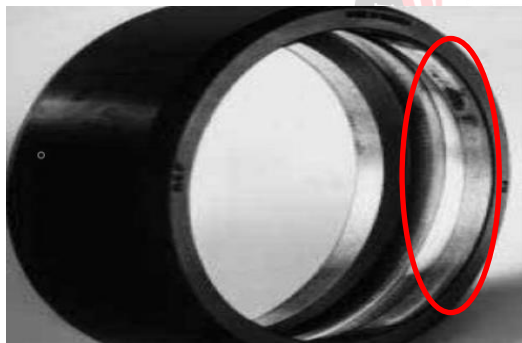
The outer ring of the deep groove ball bearing is out of alignment with the shaft which is caused due to the oval configuration of the ball on account of misalignment.
